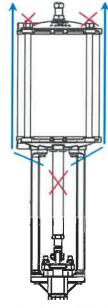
Knife Gate Valve with Pneumatic Cylinder Actuator, Vertical Lifting
